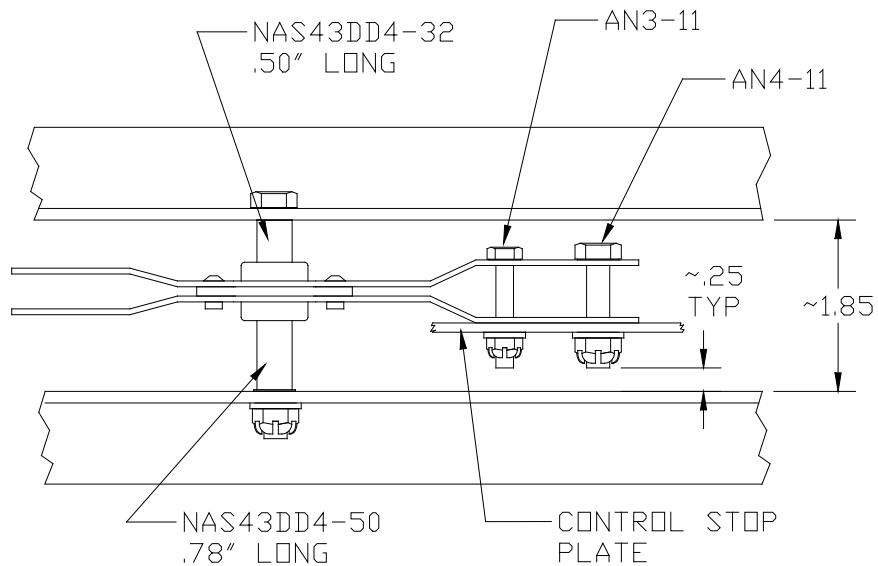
Modified Elevator Bellcrank Installation for Improved Clearances
